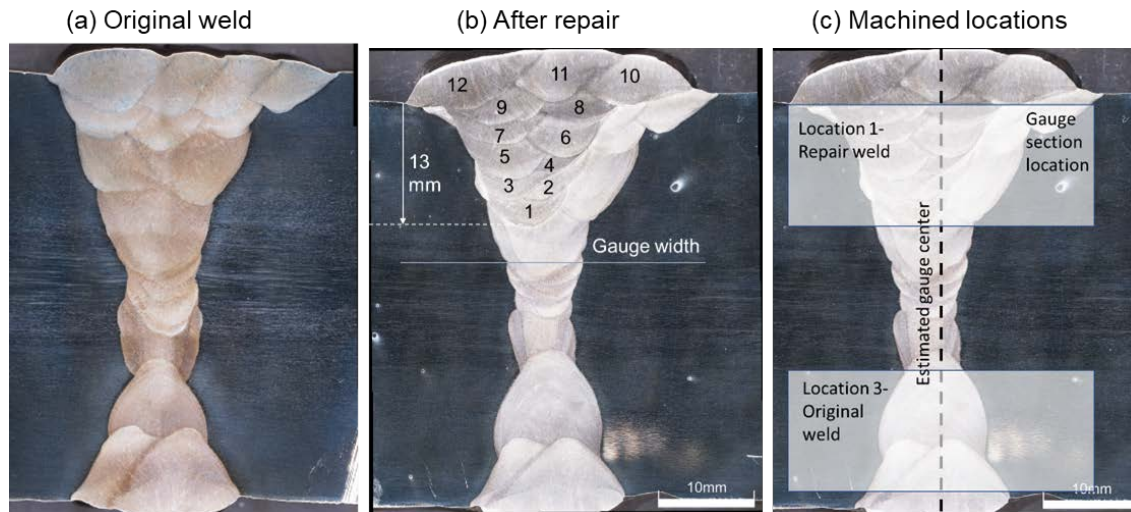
Macro images of seam E347-347H wall weld in (a) as-welded condition and (b) after repair using E16.8.2 to a depth of 13 mm. (c) Machined gauge sections with respect to repair weld and original weld filler
